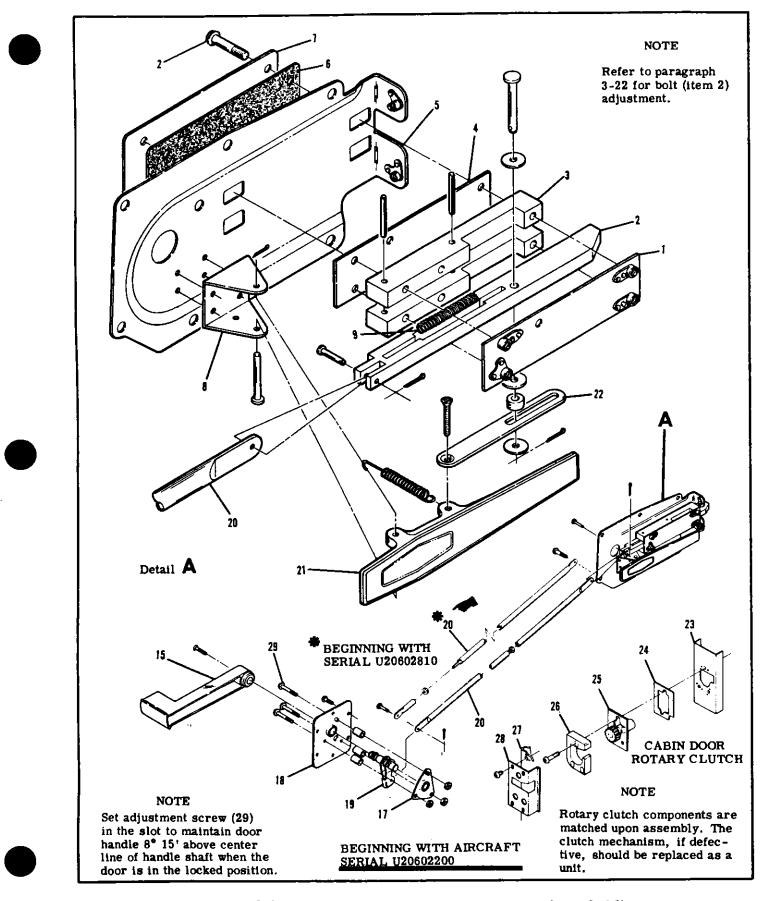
Door Latch and Rotary Clutch Components (Sheet 2 of 2)
